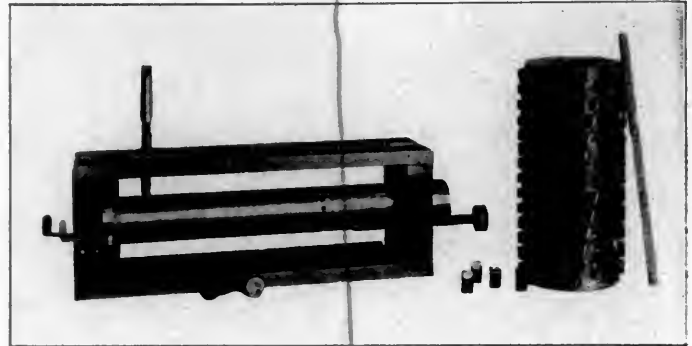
Drilling Jig for Peg Slab Milling Cutters
